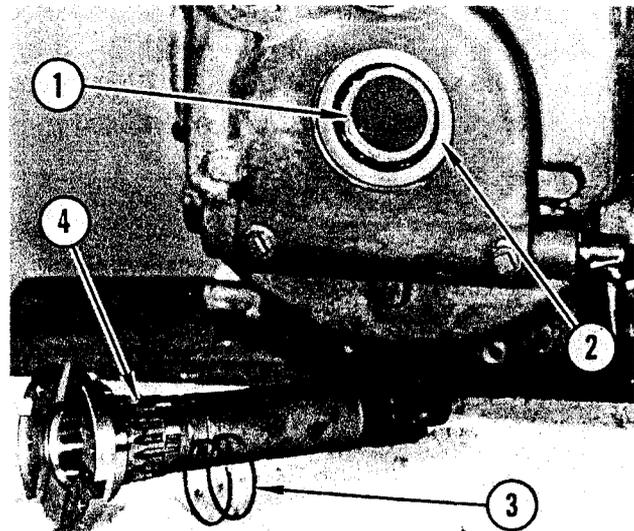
CLUTCH SHAFT ASSEMBLY
